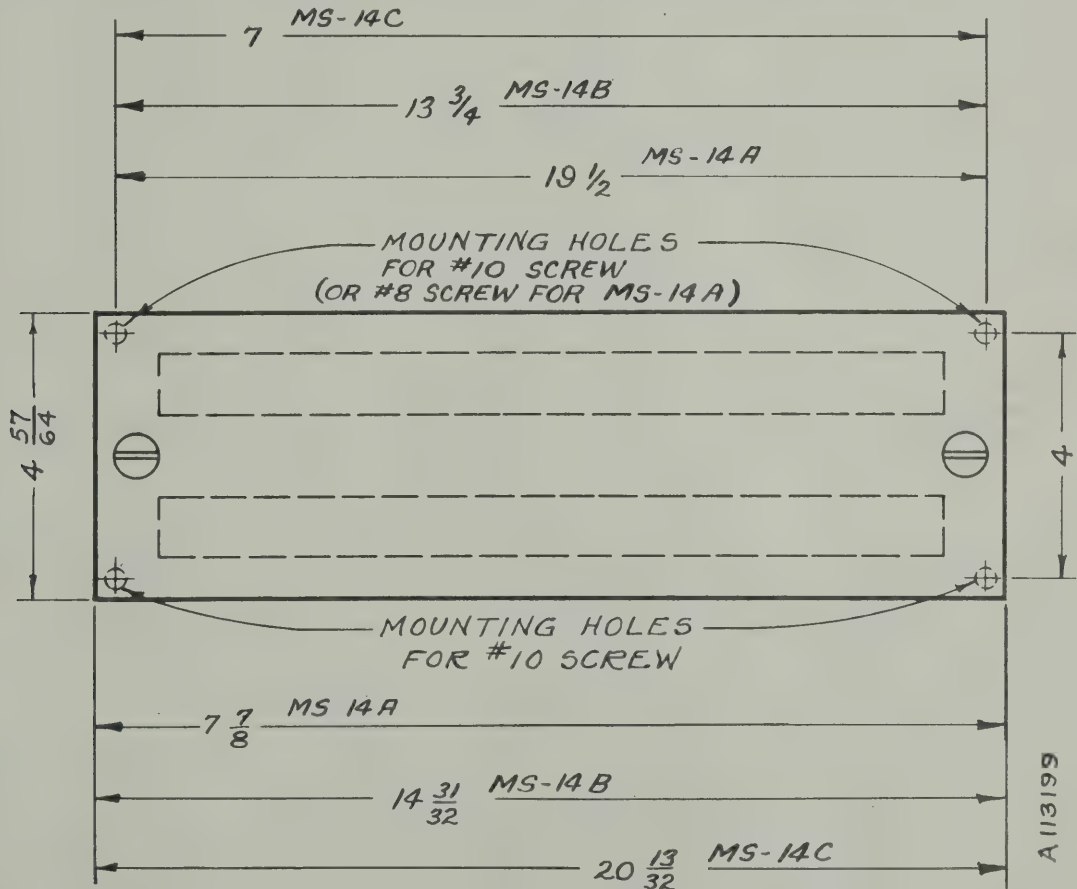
TYPE MS-14 JUNCTION BOX, OUTLINE AND MOUNTING DIMENSIONS
